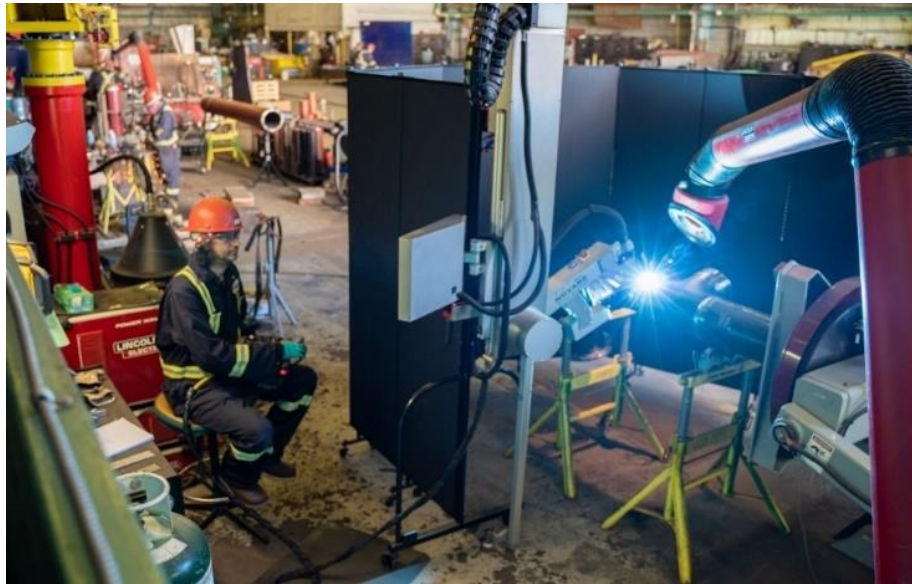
HUMAN OPERATING WELDING ROBOT WITHIN THE VANCOUVER SHIPYARDS [13].
